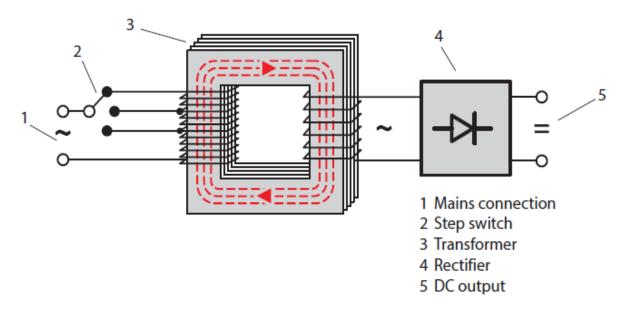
3 - Welding power source schematic with step switch control. [14]
